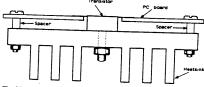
Mounting arrangements for pcb, transistor and heat sink
